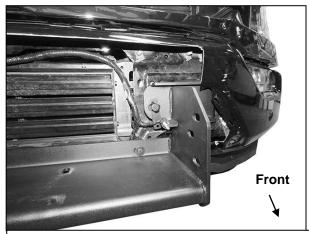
Attach factory bumper with inner Winch Tray Bracket Assembly to end of frame
